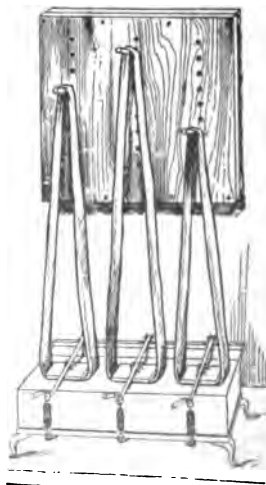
A rack for vulcanizing different size tubes. This device can be used in connection with the small tube vulcanizers.
